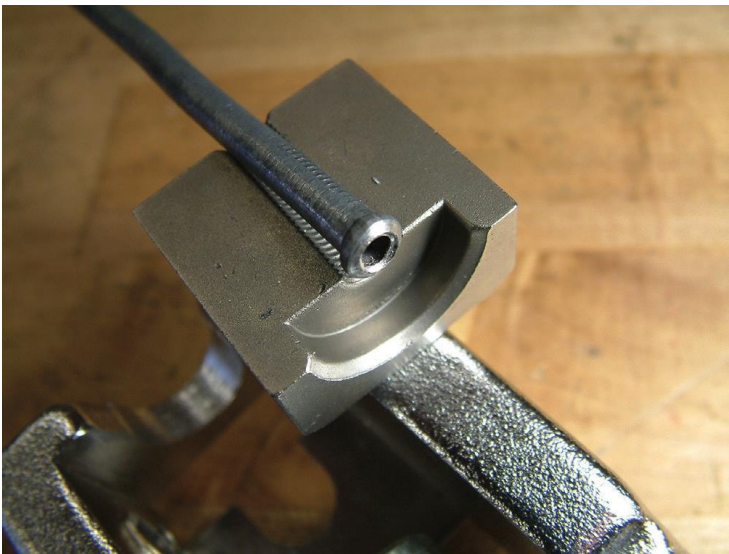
Making an ISO flare requires a special tool and the proper size forming mandrel.
